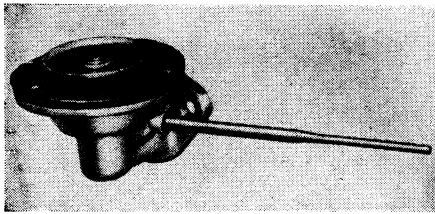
Series R. Showing thick portion of assembly pin holding rocker arm and link in position
